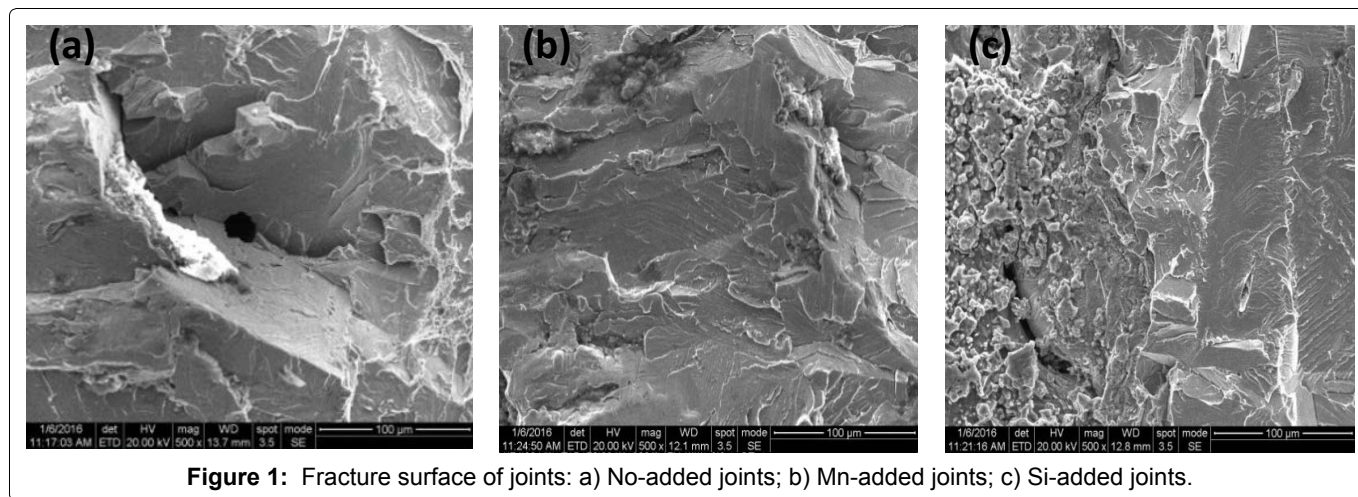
Fracture surface of joints: a) No-added joints; b) Mn-added joints; c) Si-added joints.
